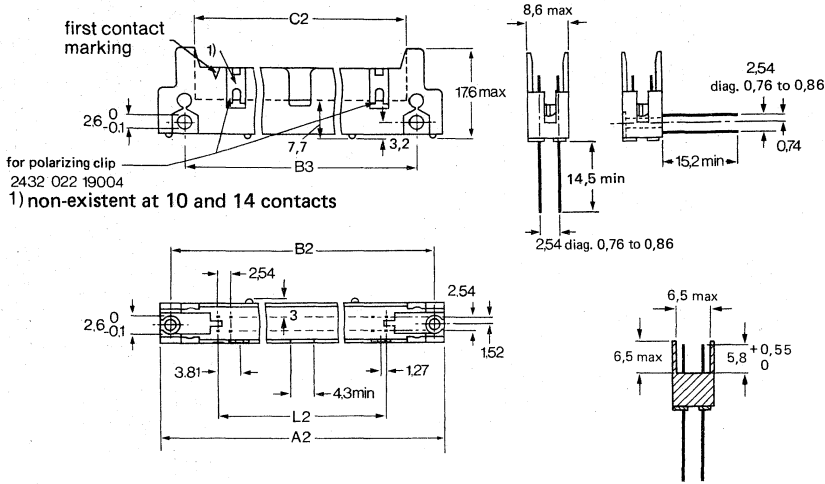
Male header with pins for wire wrapping; see Table 4 for dimensions A2, B2, B3, C2 and L2.
